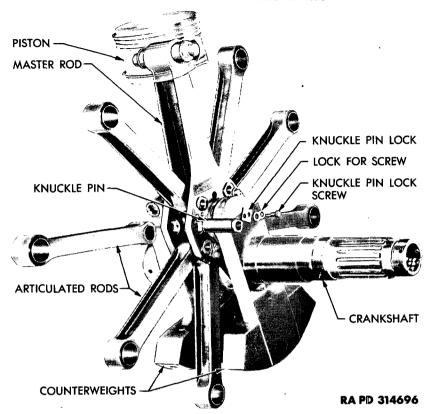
Crankshaft, Connecting Rods, Piston, and Knuckle Pin Assembly
